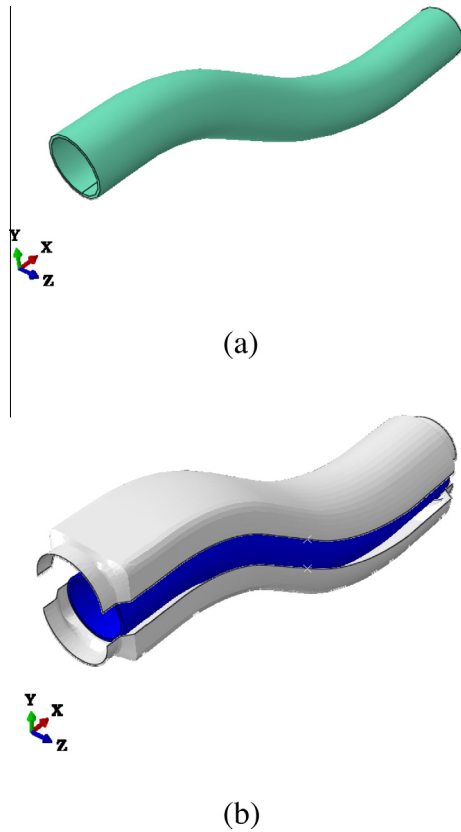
Solid model of the S-shaped air duct (a). SMP curved tube. (b) Assembly between inner, outer moulds and the tube.
